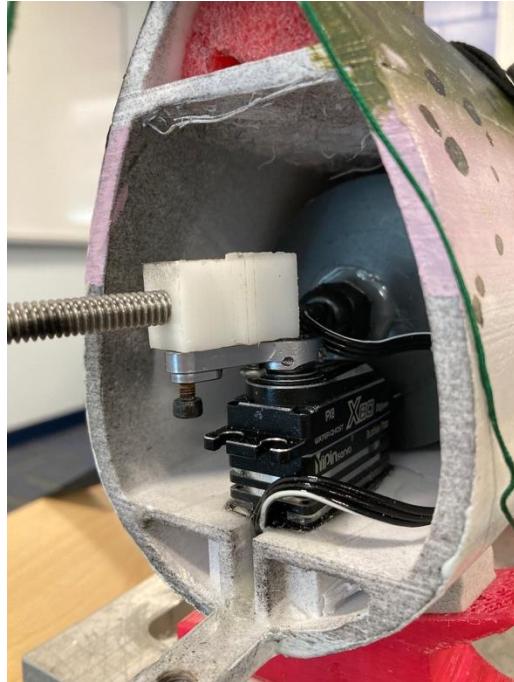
Acrylic mounting block to connect threaded rod to servo arm.
